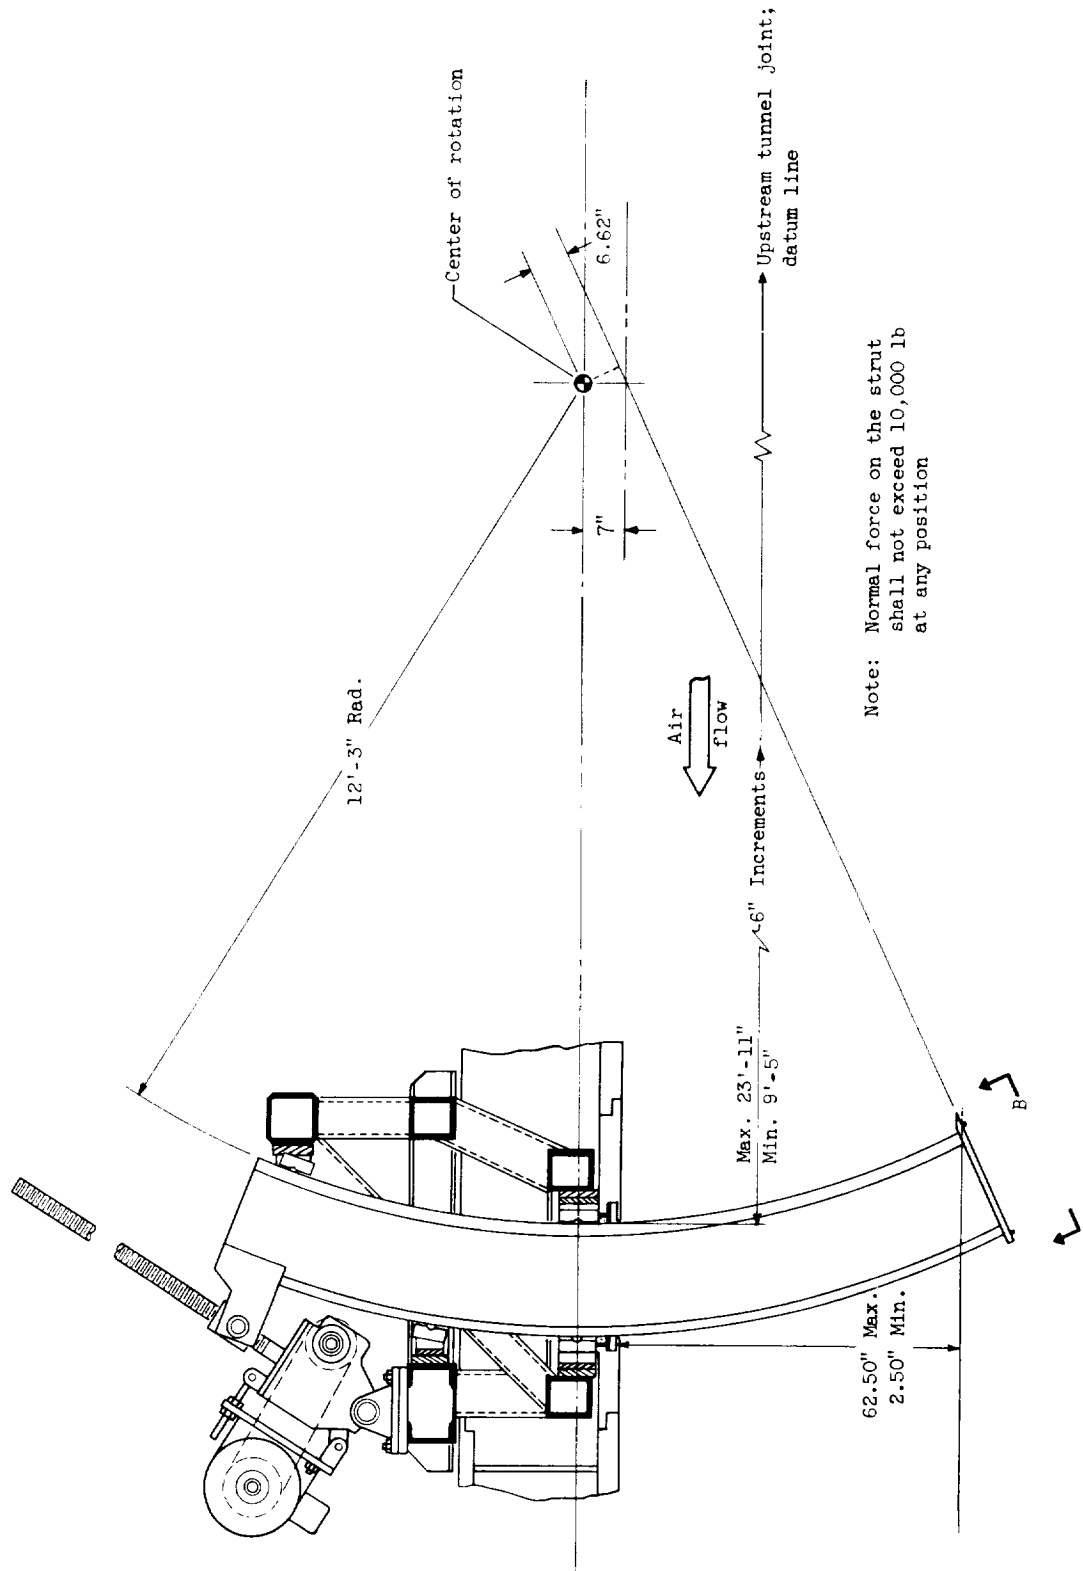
Auxiliary strut, Lewis Unitary Plan Wind Tunnel.
